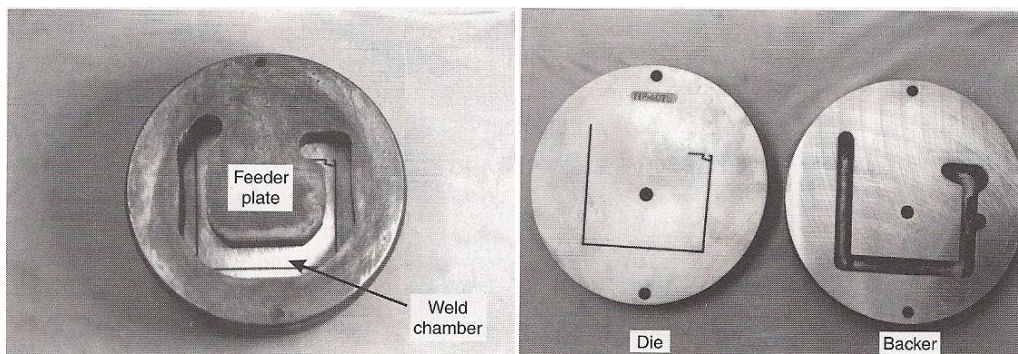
Example of Solid Die with Feeder Plate [22].
